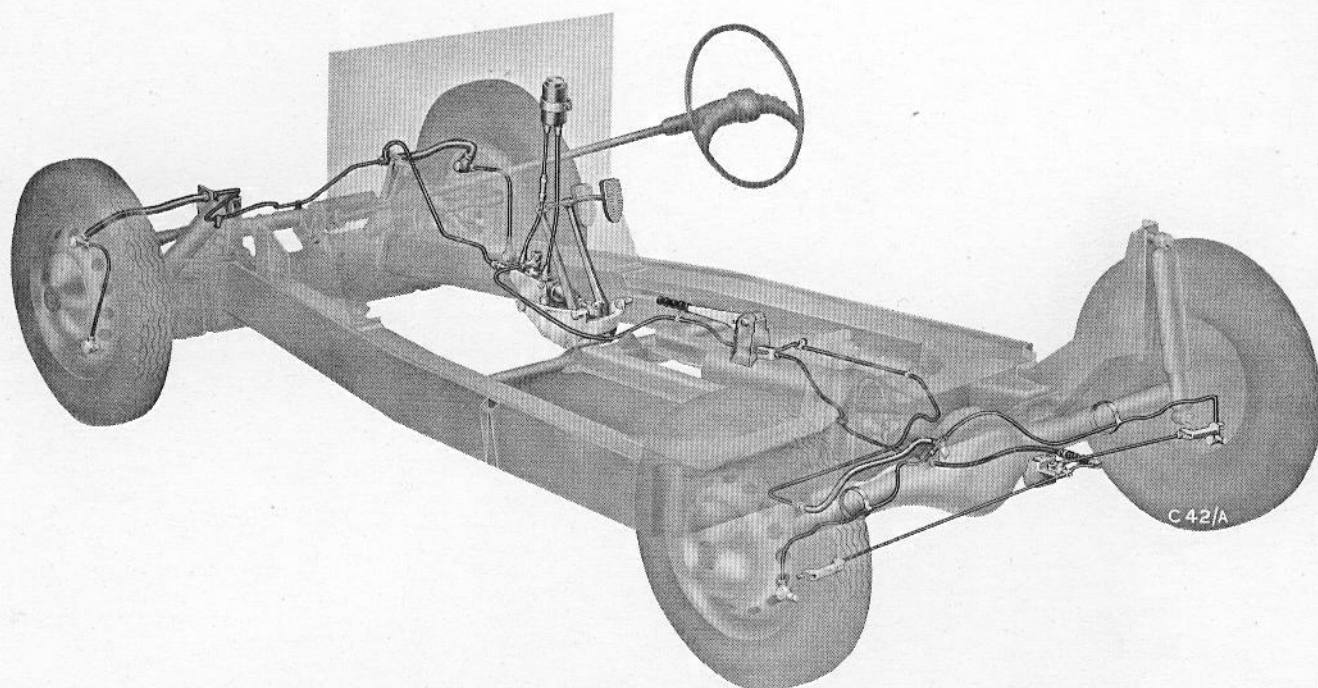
Braking system (Type 404 car) tandem master cylinder
